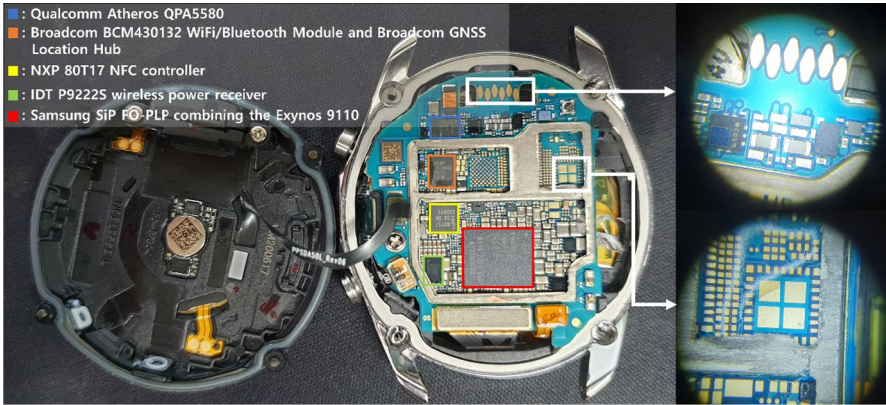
PCB of Galaxy watch 3—on the right is an enlarged view of the unmarked port on the PCB
